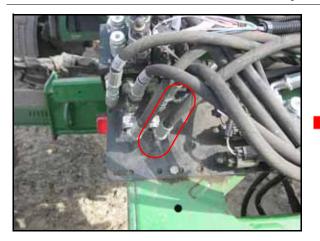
Pressure and Tank Hoses Installed on the Machine
